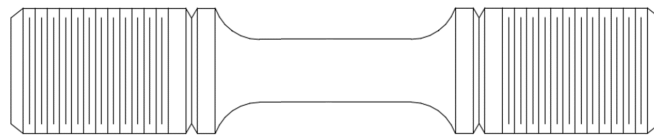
Schema of the design for ~2.5 inch (6.35 cm) long, ~0.25 inch (0.635 cm) diameter cylindrical tensile samples having $\frac{1}{4}$ – 20 threaded ends tapering down to a smooth, ~0.125 inch (0.317 cm) diameter gauge section, which satisfy ASTM Standards E8¹ and E21² for room temperature and elevated temperature tensile testing, respectively. The complete engineering drawing is shown in Appendix B Figure B.5.
